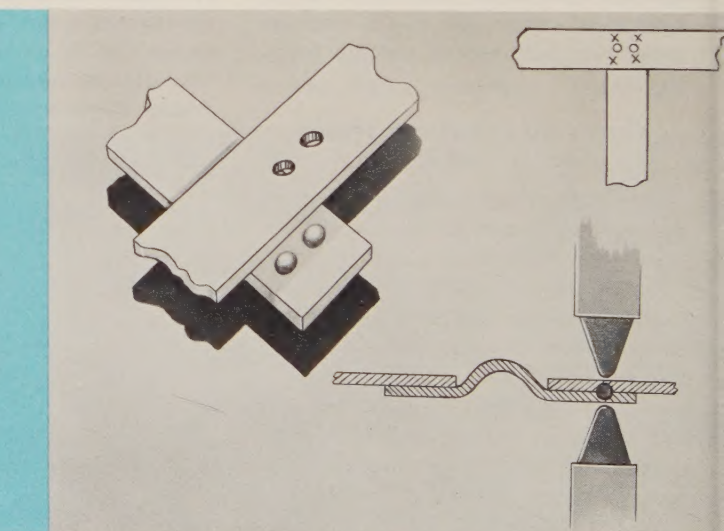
Example of how design can reduce human effort and error in manufacture and assembly. (Left) The drawing shows how, in welding two parts together to form a T-shape, a fixture is needed which requires clearance to take parts of high limit. This permits the low-limit parts to be welded in the unsatisfactory
